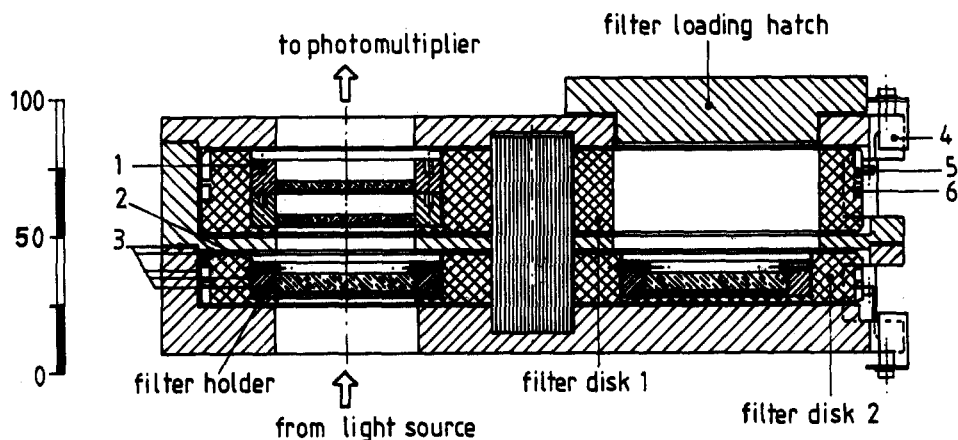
Schematic drawing of the filter assembly. Its major components have been indicated. The scale is in mm. The thickness of the fabric sealing between the parts has been exaggerated. (1) Threaded hole for filter-holder removal; (2) lock-screw securing interference filter; (3) fabric sealing between moving and nonmoving parts; (4) microswitch (one of four per filter disk); (5) activating notch for microswitch; (6) groove for belt driving filter disk.
